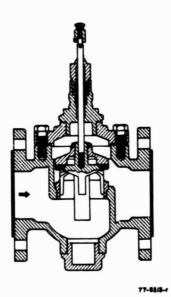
Flanged, Cast Iron, Direct Acting, 250 psi Valve Body 2-1/2 thru 6 Inches.
